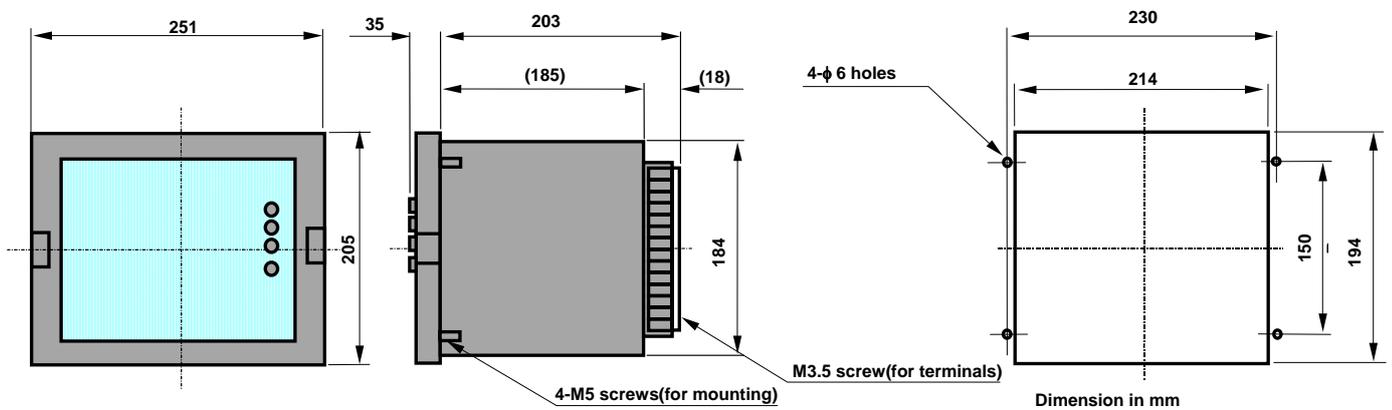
Outside dimension /drilling drawing (D2 Case)
